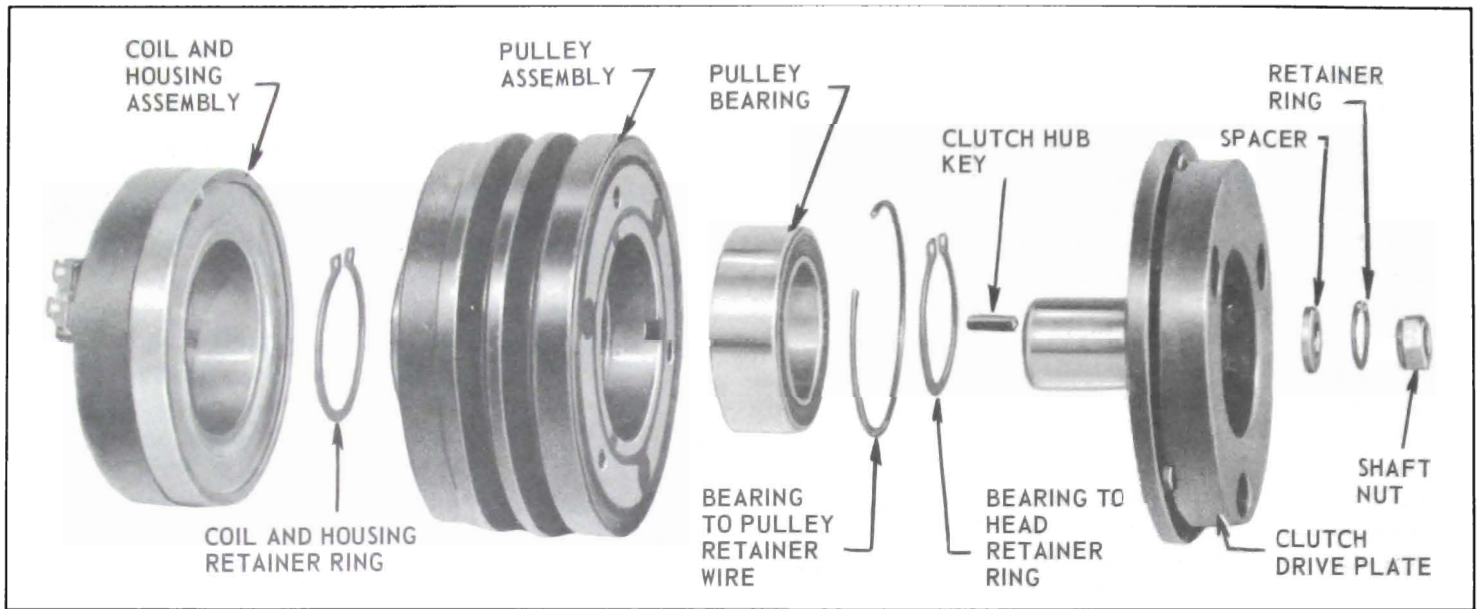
Compressor Magnetic Clutch Assembly - 4600, 4700 and 4800 Series
